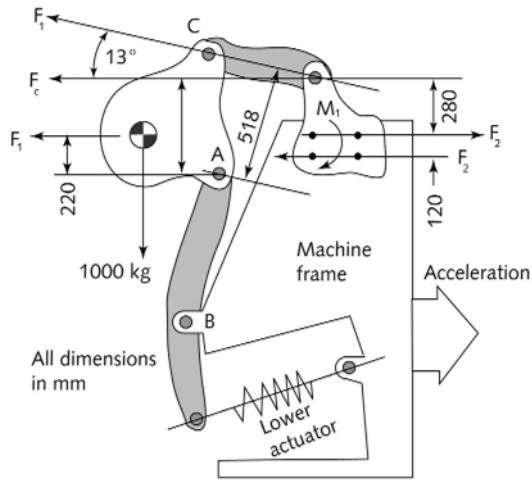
Simplified mechanism schematic of the major moving parts of the airknife machine indicating acceleration of the crated machine
